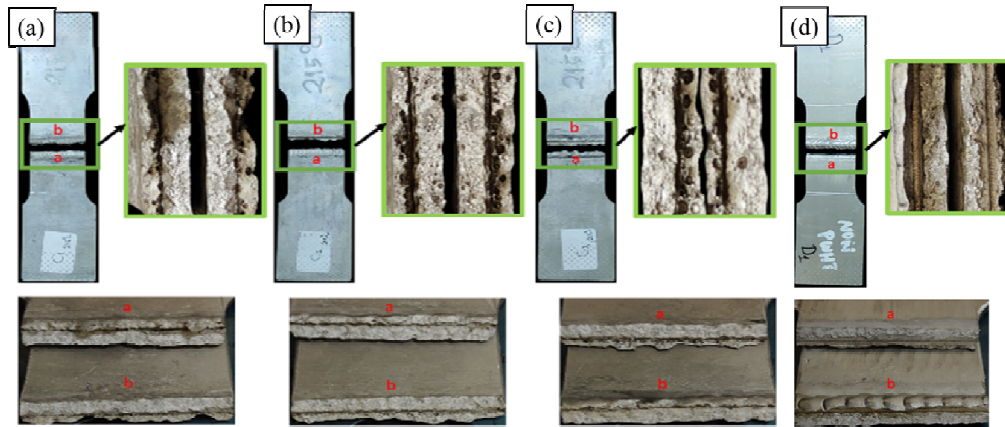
The fracture area of the welded AA6061-T6 with different artificial aging temperatures: (a) T155, (b) T185, (c) T215, (d) WM-Non PWHT/T0.
